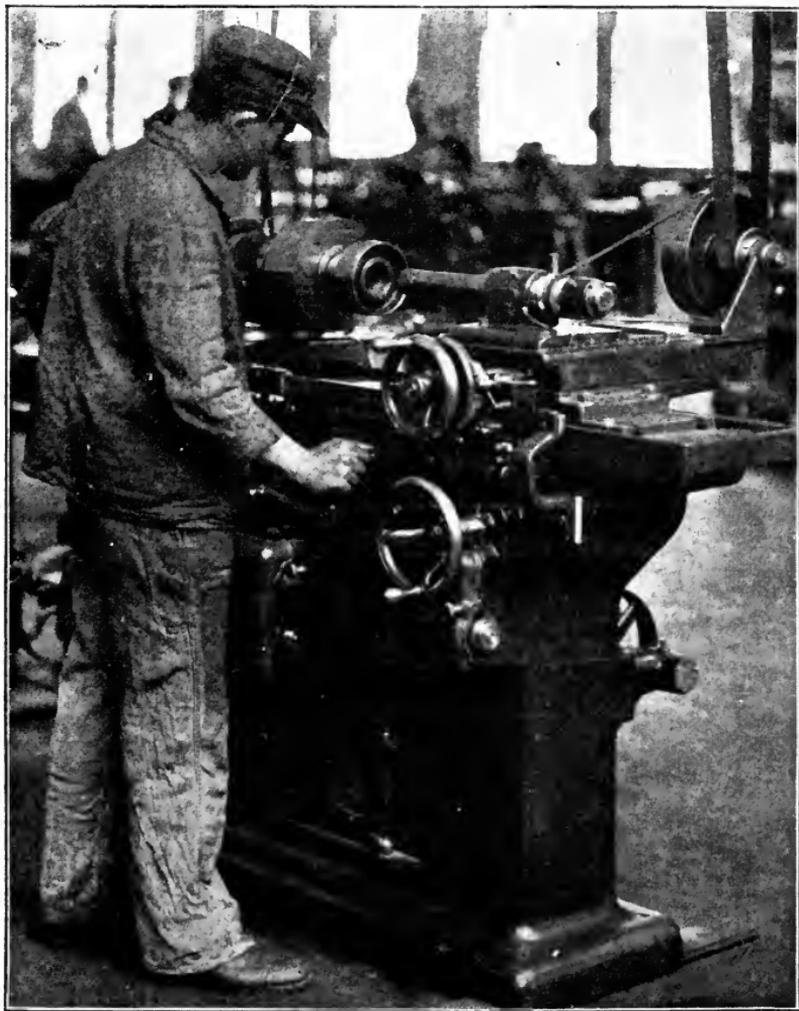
Heald Internal Grinder Fitted with Magnetic Chuck
